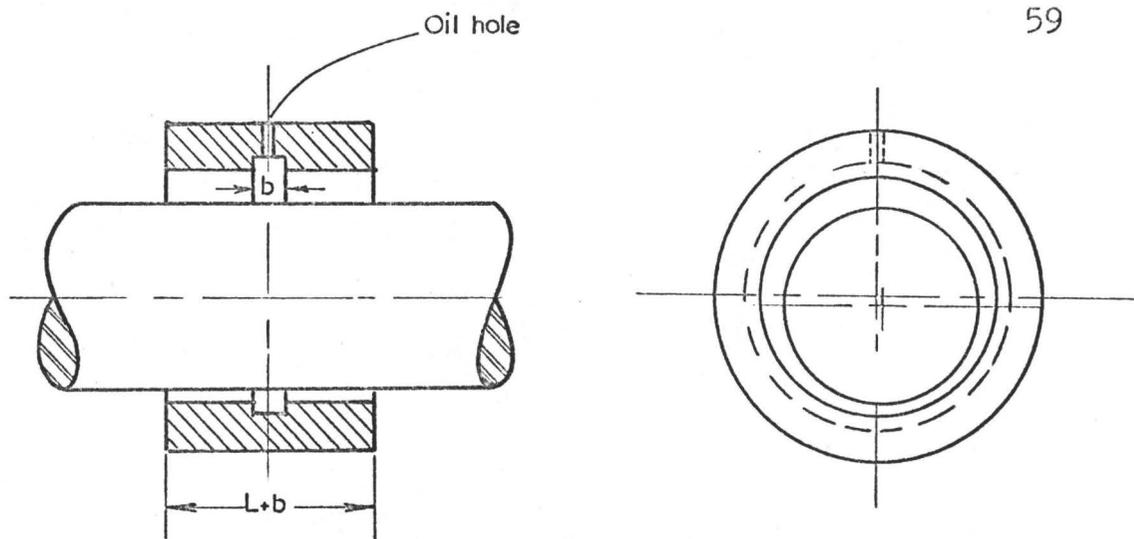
Full_cylindrical journal bearing with a circumferential oil groove
